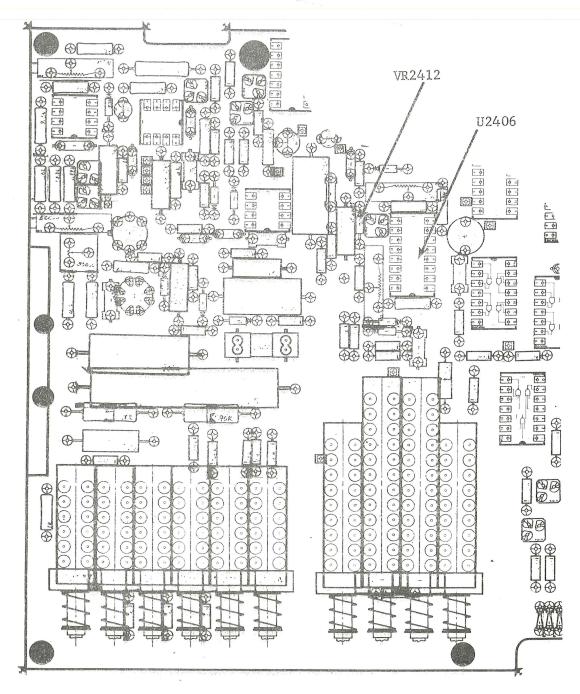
(DM43 or DM40) Partial Main circuit board (A1) showing locations of changed and removed components.
